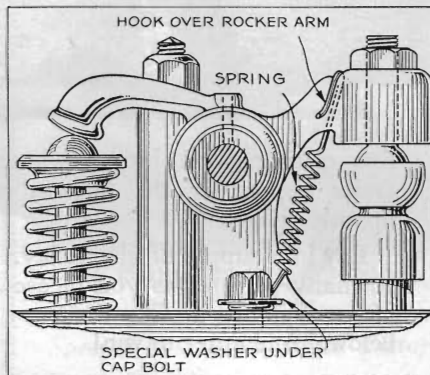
An auxiliary spring fastened to each rocker arm on overhead valves will stop rattle.
